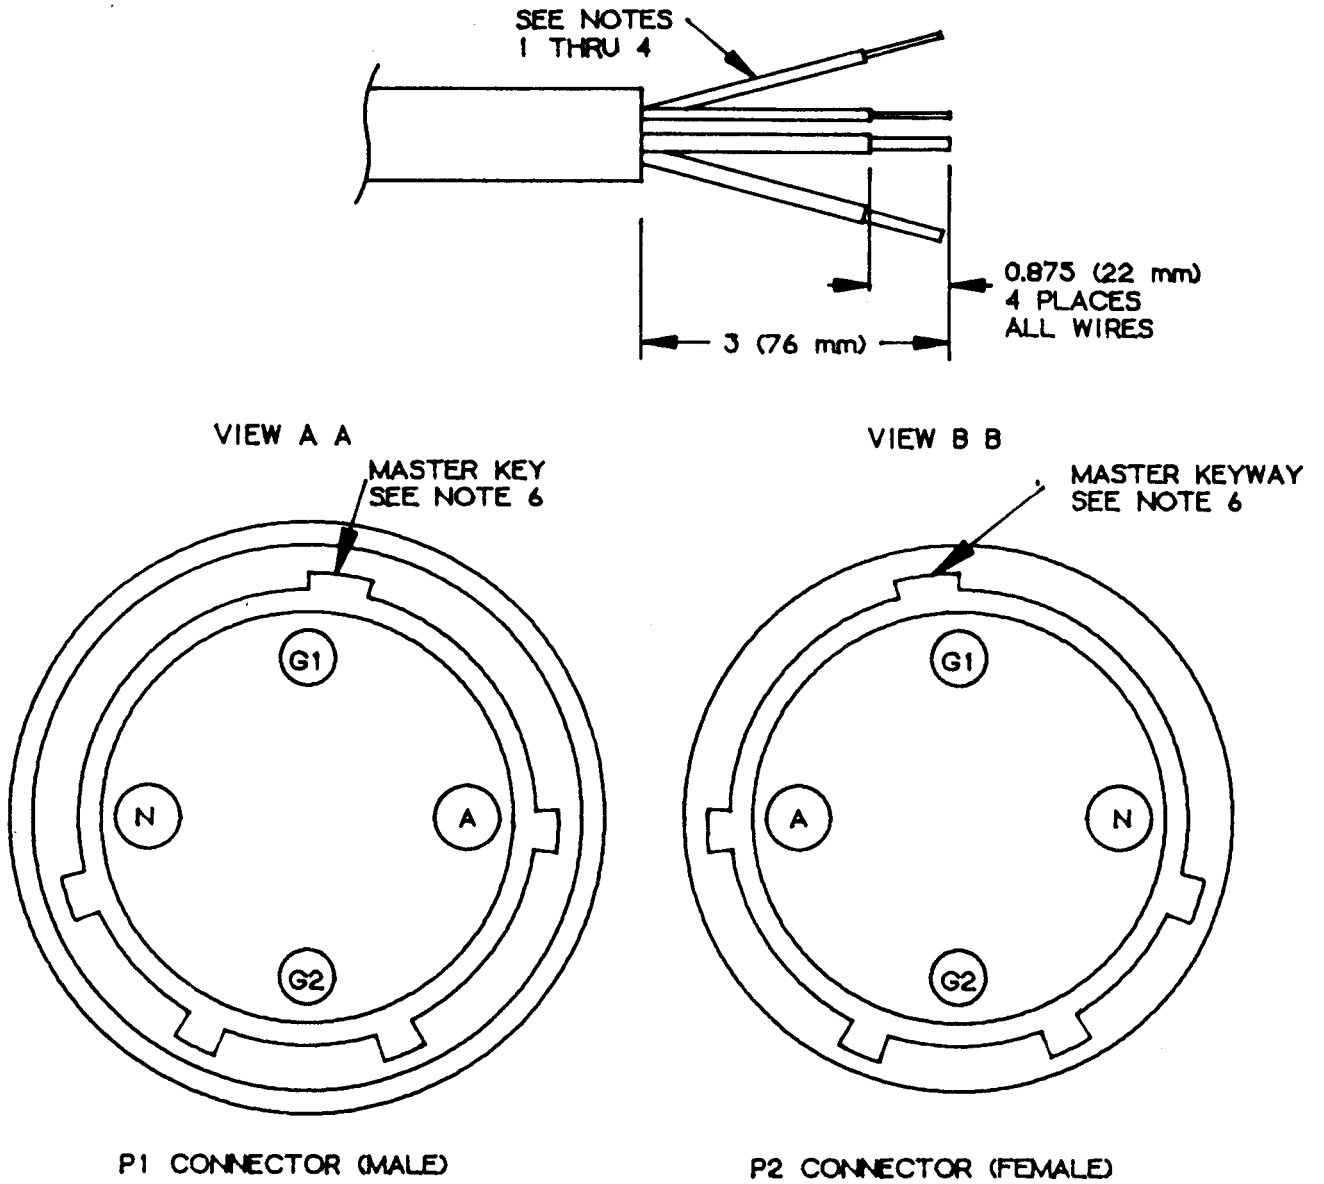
60-amp, 50-ft (15.2m) service/feeder cable. (sheet 2 of 3)
